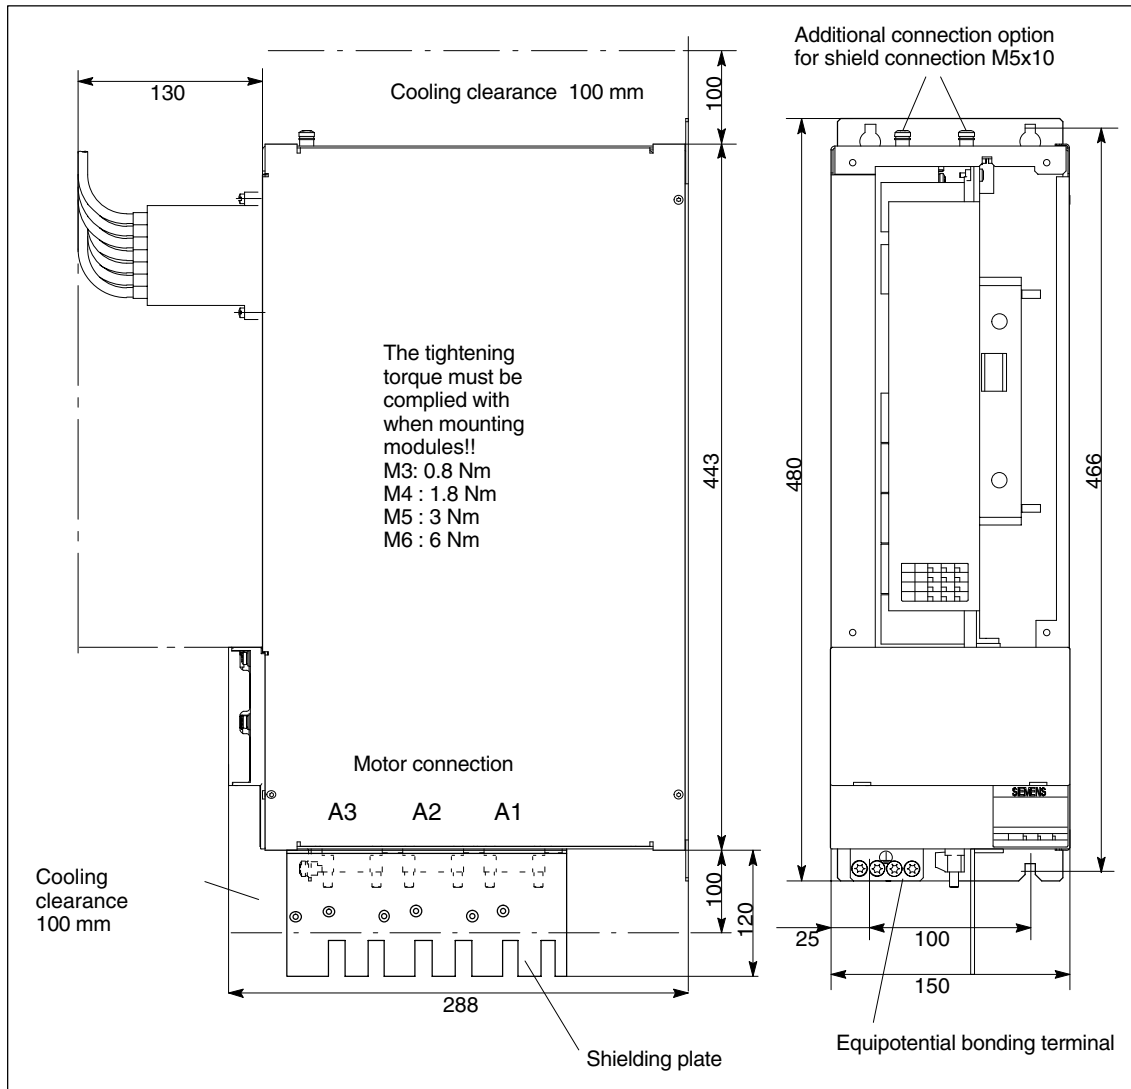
Dimension drawing of the 3-axis CCU box
